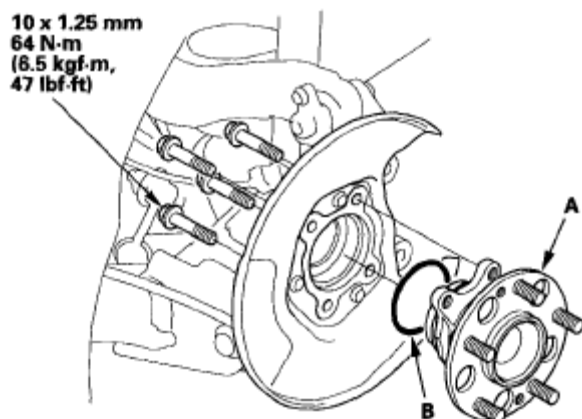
Identifying Hub Bearing Unit And O-Ring (With Torque Specifications)
